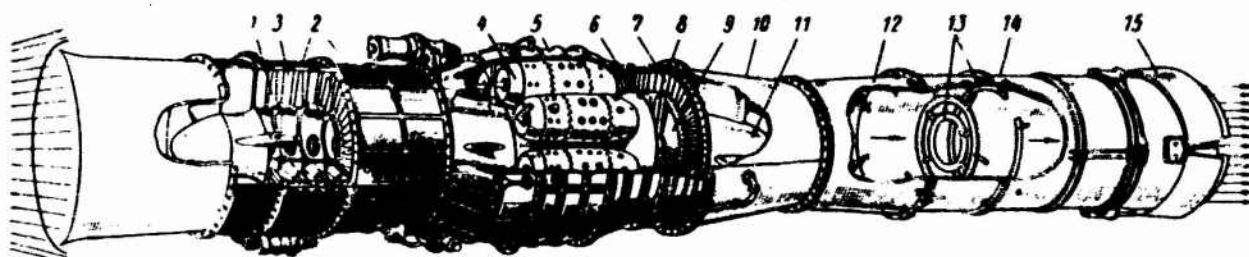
Diagram of an aircraft gas turbine engine with afterburner: 1 - compressor rotor blade; 2 - compressor housing; 3 - stator blade; 4 - flame tube of the combustion chamber; 5 - combustion chamber housing; 6 - turbine nozzle box blade; 7 - turbine rotor blade; 8 - turbine housing; 9 - turbine wheel; 10 - external cone; 11 - internal cone; 12 - afterburner fuel injection nozzle; 13 - flame holder (exploded view); 14 - afterburner housing; 15 - adjustable nozzle.
